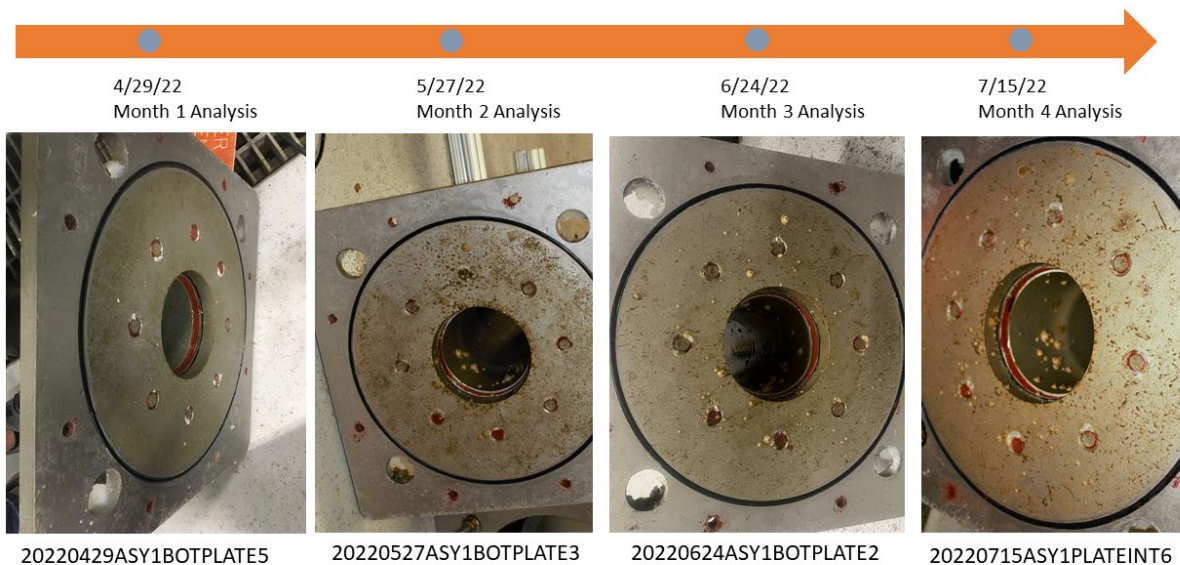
Lower plate of assembly 1 after removal from assembly, photographed at 1 month intervals over 4 months of testing
